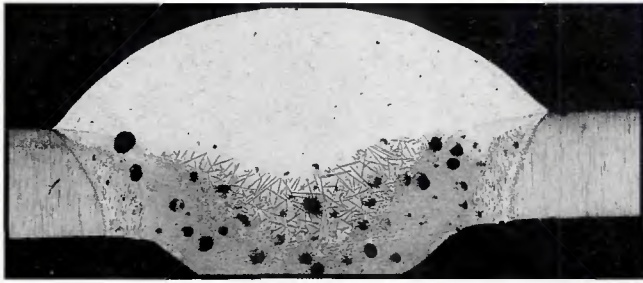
Weld made with no preweld heat treatment, AC, ER4043 (no etchant, 11X).
